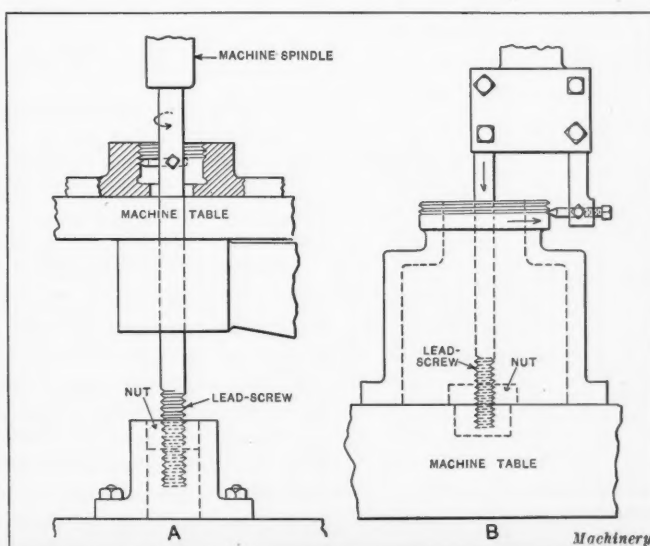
(A) Method of cutting Threads on Drilling Machine with Single-point Tool. (B) Makeshift Arrangement for cutting Threads on Vertical Boring Mill
